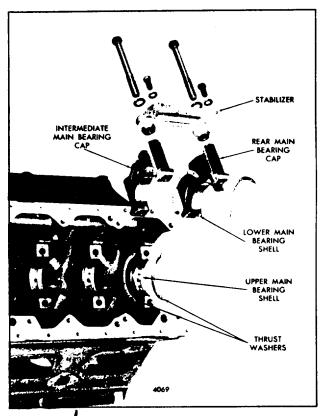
Main Bearing Shells, Bearing Caps and Crankshaft Thrust Washers V-Type Engines
